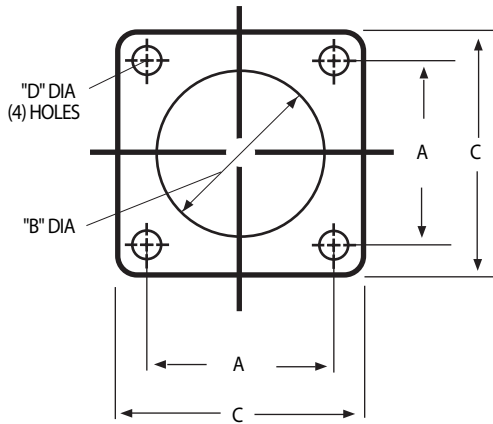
shows an outline drawing of the typical connector gasket. The tabular dimensions for each of the standard connector gasket sizes are in Table 4.
